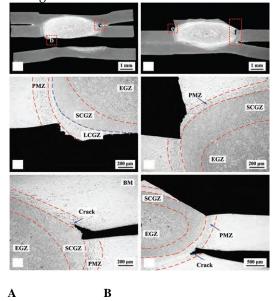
Macro/microstructures of Type III weld joints in the 1.0/1.0/1.0 mm stack that failed in A, — IF mode; B— PO mode.
